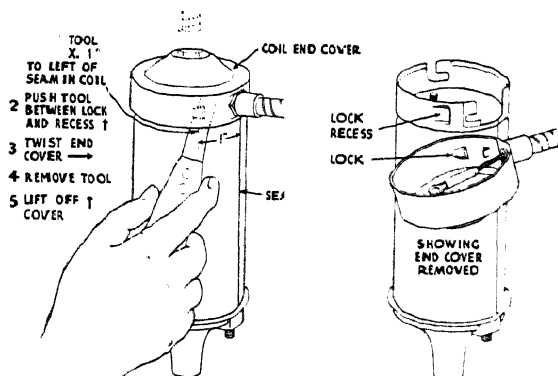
TAKING OFF END COVER OF SWITCH-EXTENSION TO PERMIT REMOVAL OF THE COIL
